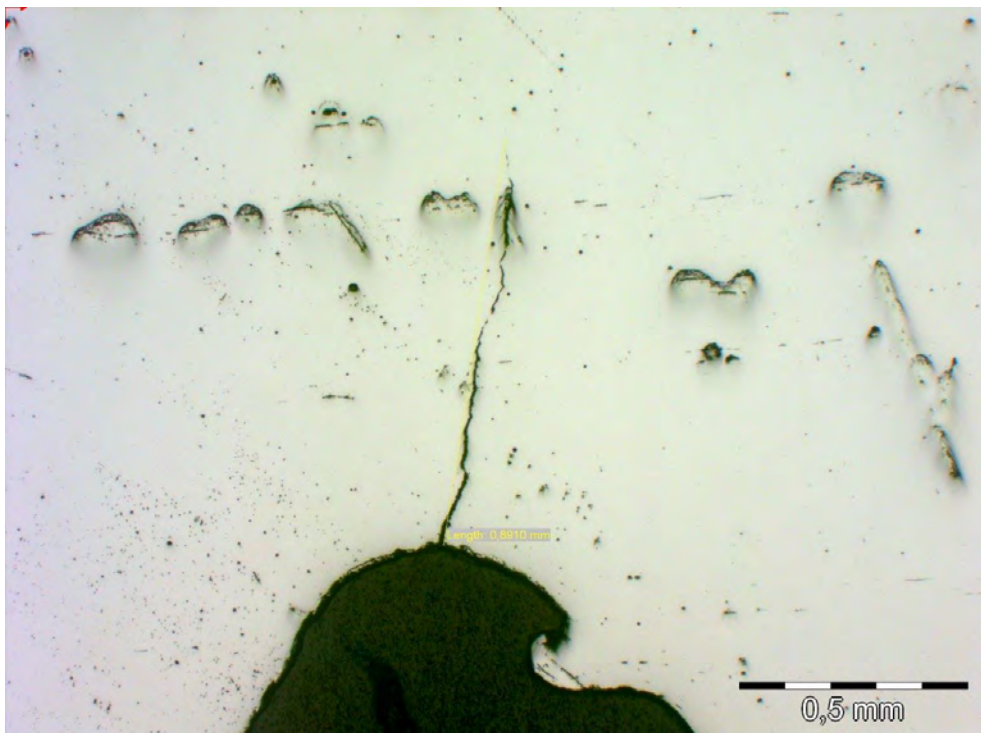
Crack at segment C, second ridge on barrel no. 14389
